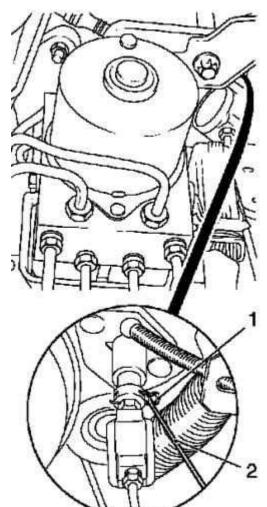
Removing the retaining clamp: 1 - holding the collar, 2 - Screwdriver
